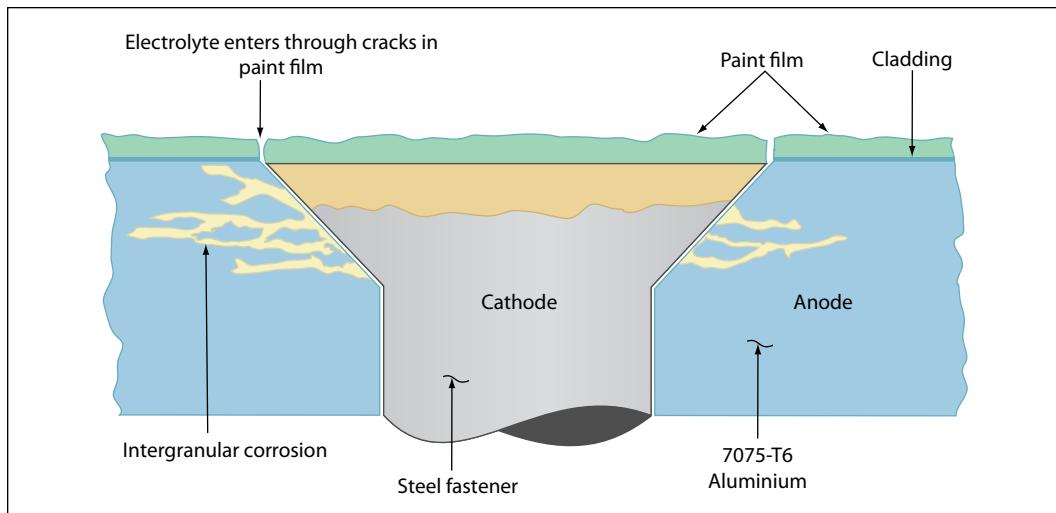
Intergranular corrosion of 7075-T6 aluminum adjacent to steel fastener.
